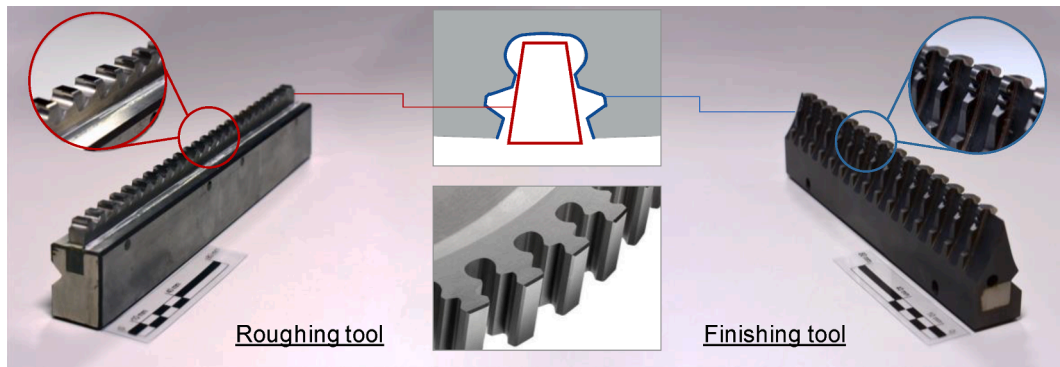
Roughing (rectangular-trapezoidal) and finishing (fir-tree) external broaching tools for turbine disks.
